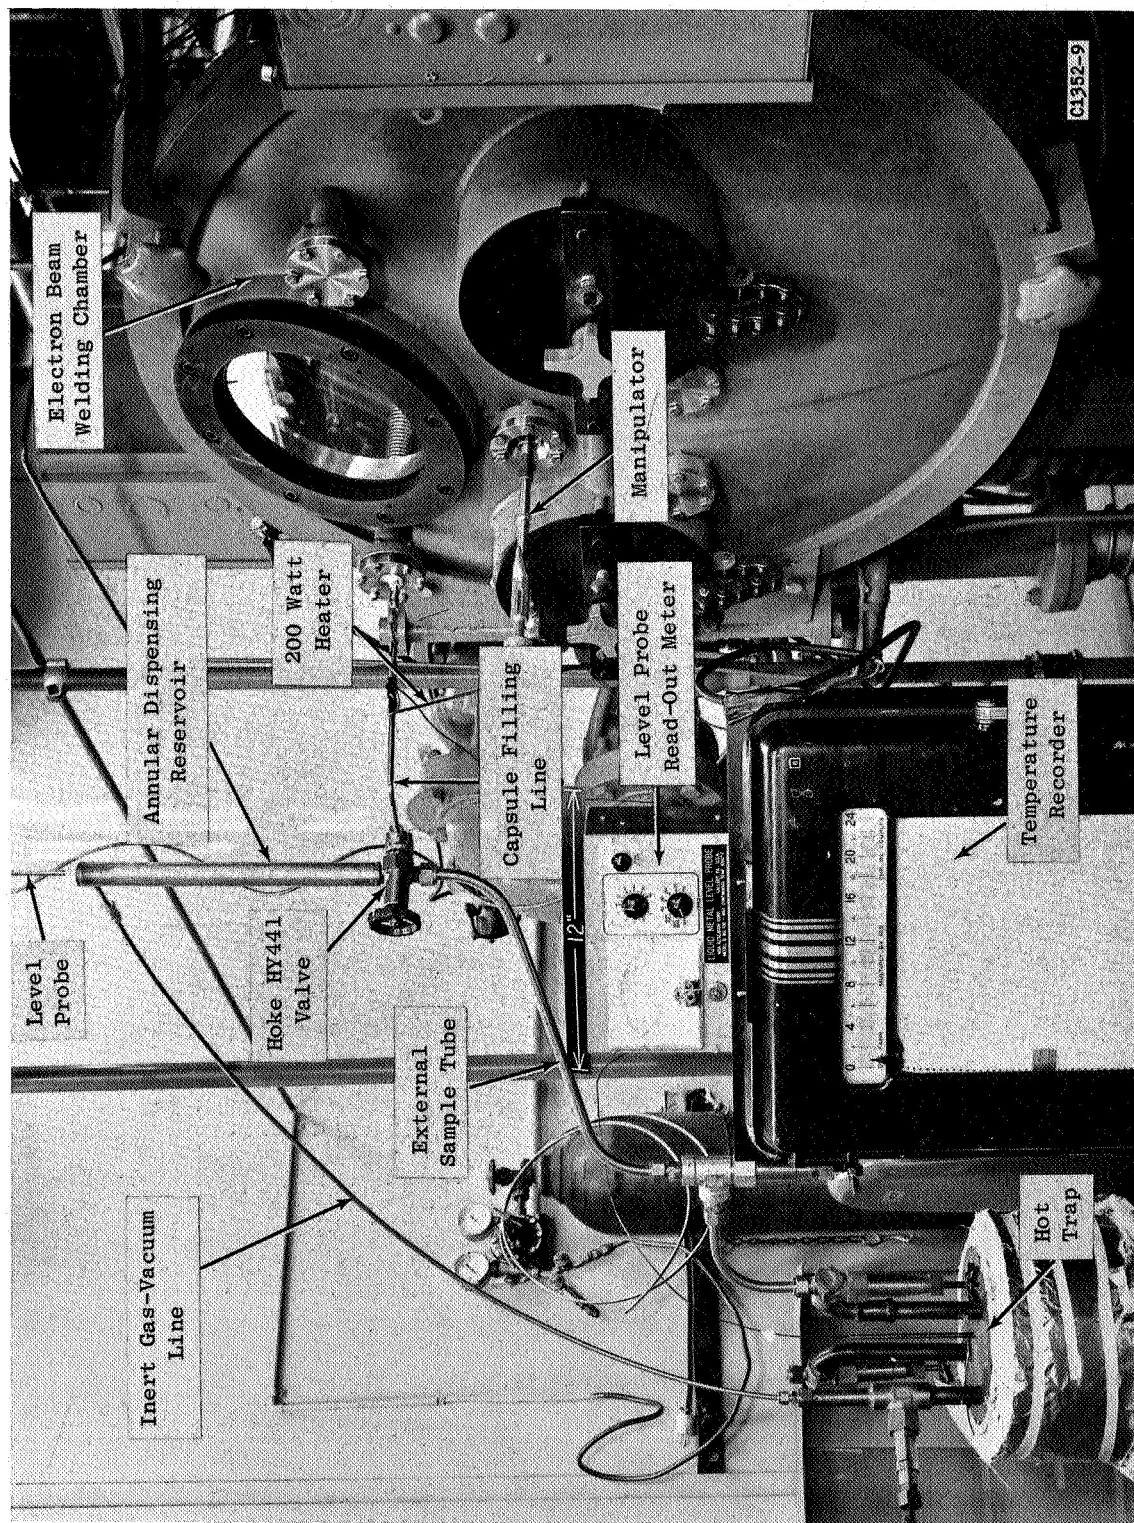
External Apparatus for Filling Capsules with Potassium in the EB Welding Chamber. (Orig. C66051941)
